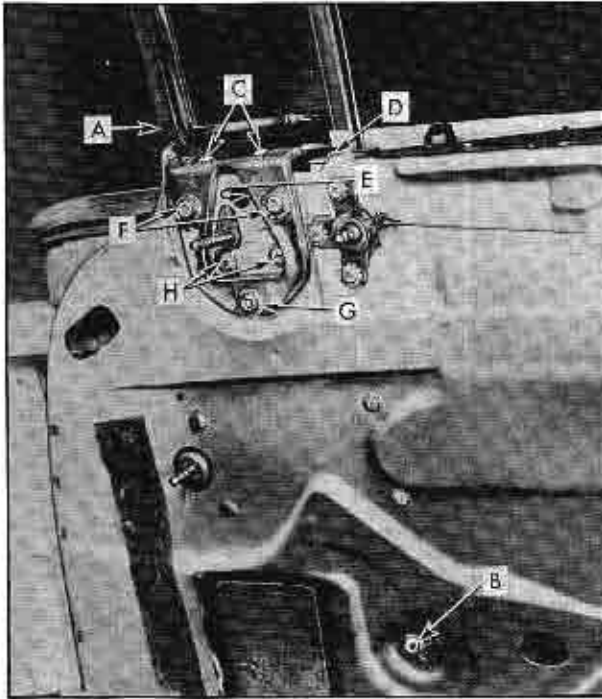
Ventilator Assembly Adjustment (6237)
